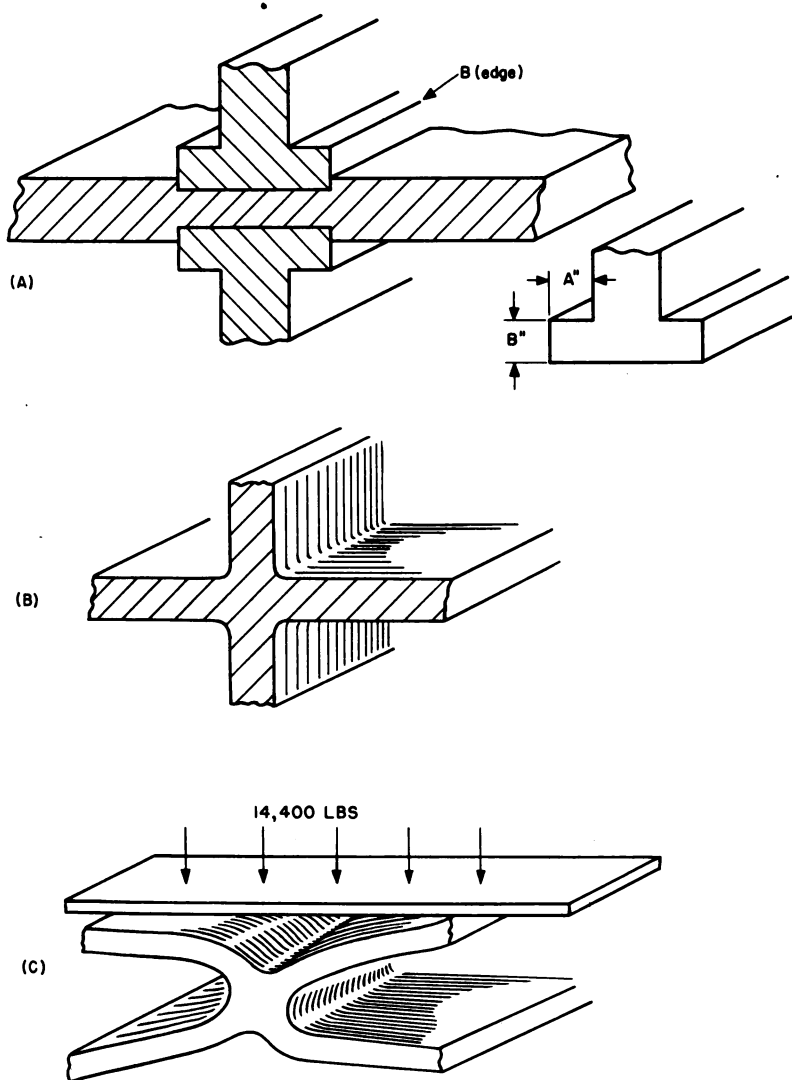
A Single-Pass Welding Joint Design for Fabricating Cruciform Shapes: (a) Component Design; (b) Weld Position; (c) Crush Test.
